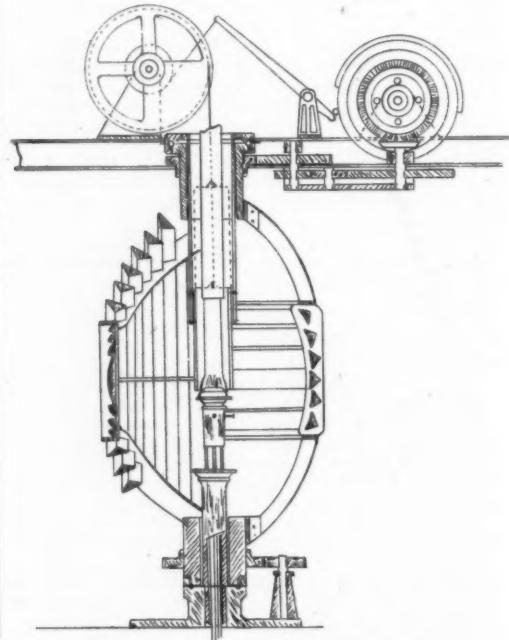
Spindle eclipsing apparatus. (Section.)
